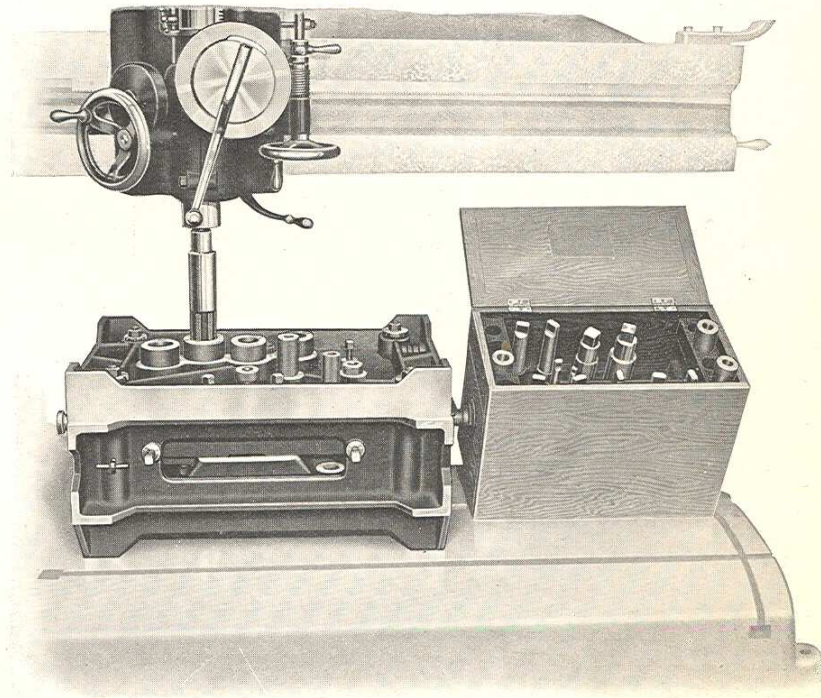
Showing the method of boring and tapping "American" High Duty Lathe Aprons thru a jig.
